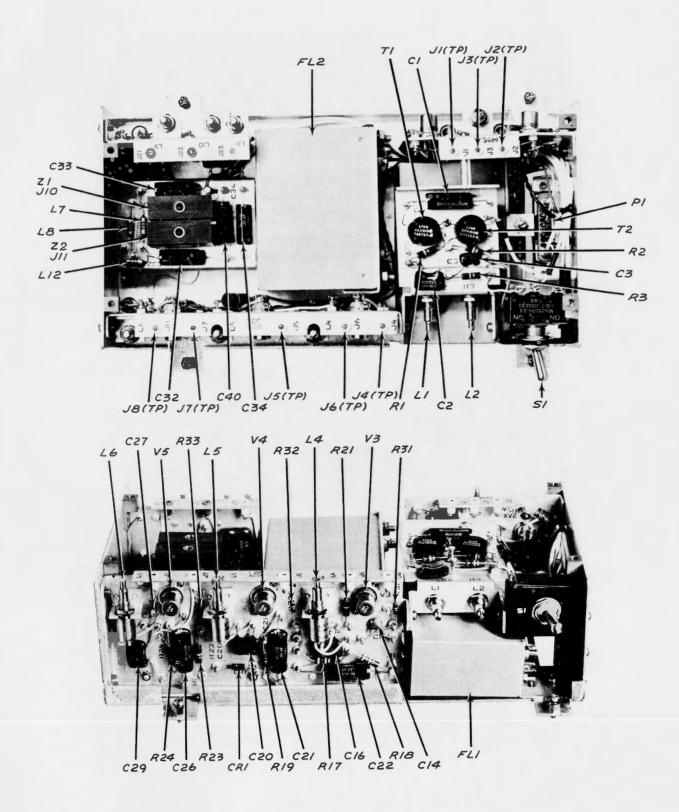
2nd Injector (A) A1A12, Parts Locationand Test Points
